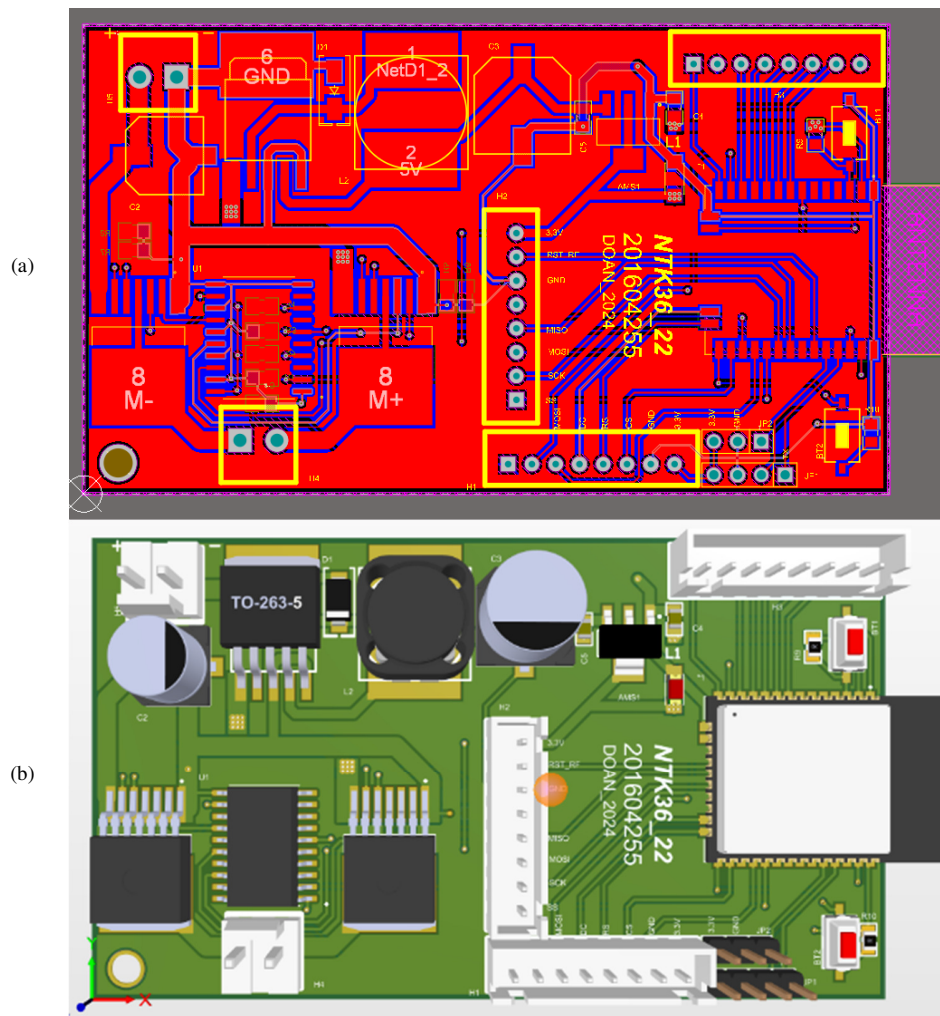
PCB layout of the central control module: (a) 2D design, (b) 3D assembled board.
